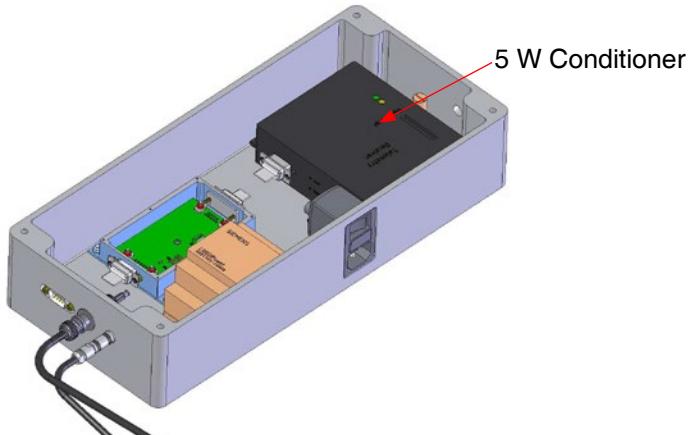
Electronics Module for TF 218 – TF 220 Torque Flange Sensors
